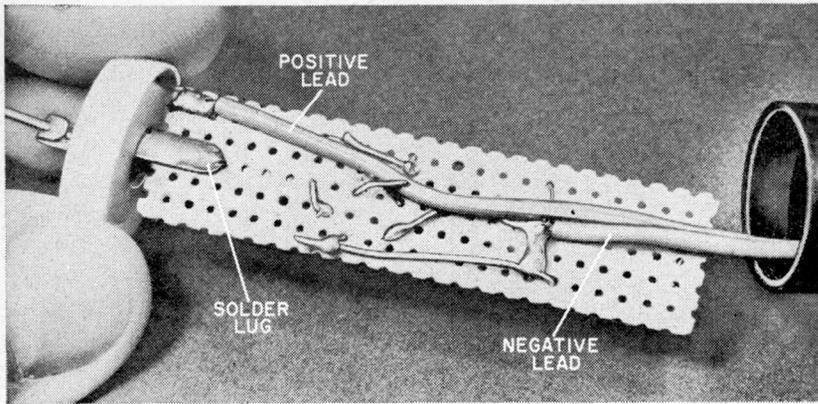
The underside of the probe board showing the two power connections, and the solder lug that connects to the probe through cover mounted hardware.
